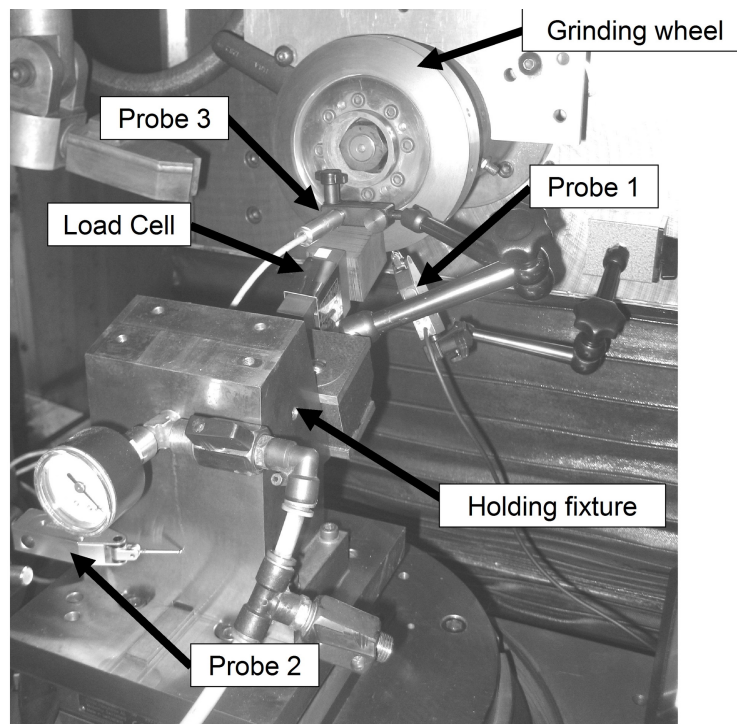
Grinding stiffness test set up - Edgetek grinding machine
